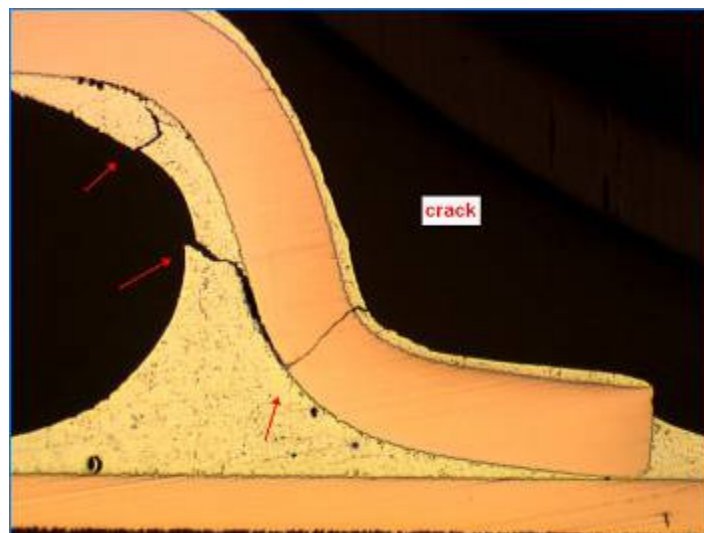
cross section, SN61, U20, right lead and solder crack, 100x
